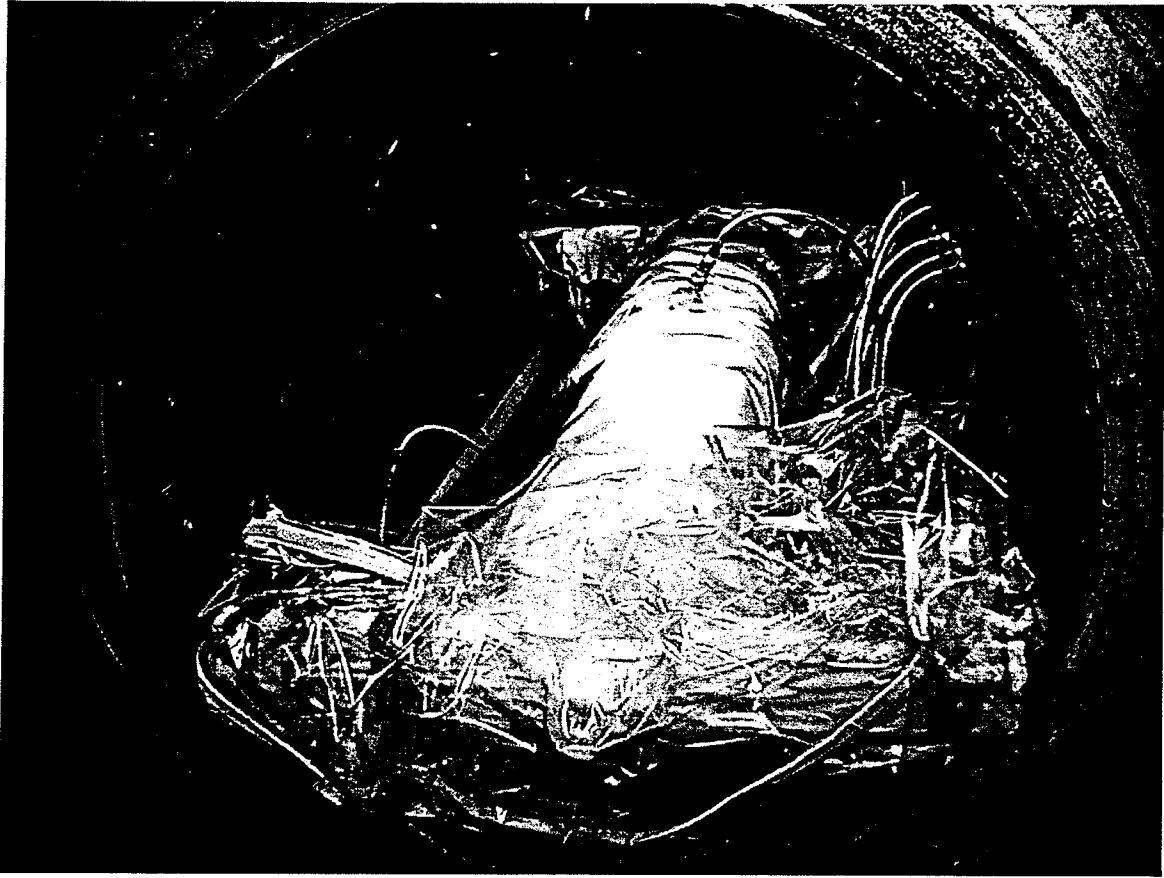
Two cell bridge inside the autoclave after complete assembly of the vacuum bag.
